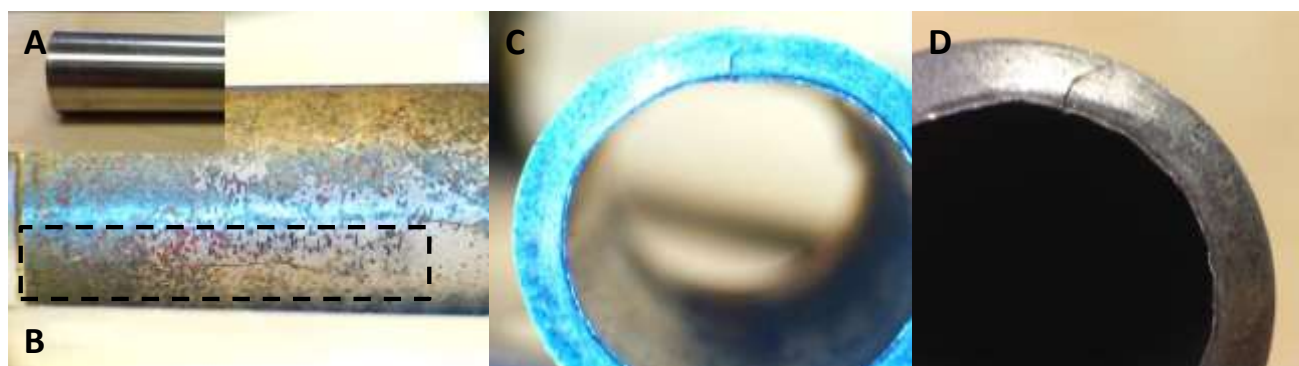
Pre- (A) and post-treatment (B, C) images of the 60 mm 304 SS tube showing initial cracks formed along the length of the sample. D shows an extended crack following manipulation to fit cap.
